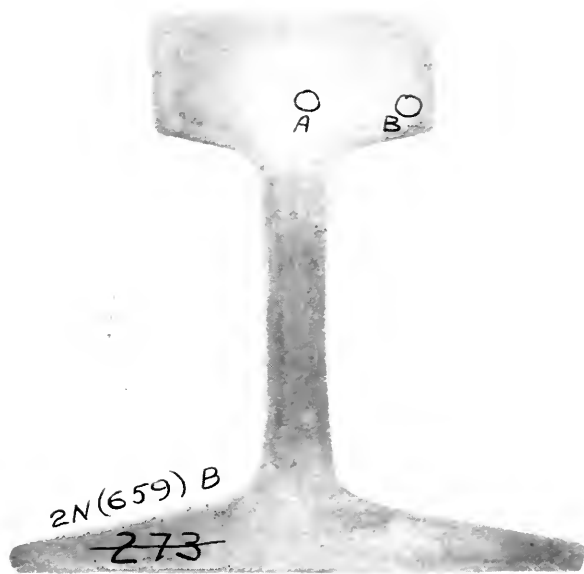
N(659)B. LIGHT ETCHING OF RAIL 655.
